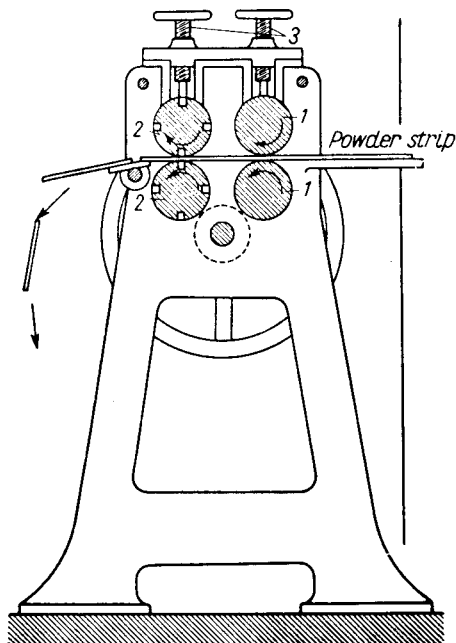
A cutter for powder strips with smoothing and cutting rollers, according to Yegorov [11].
